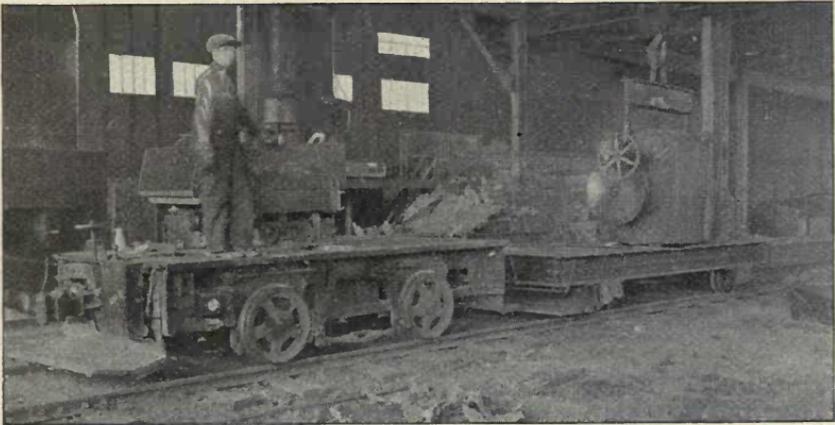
Transfer train consisting of electric motor car and trailer with crane ladle. This equipment is used in carrying cupola and converter metal to the electric furnaces
